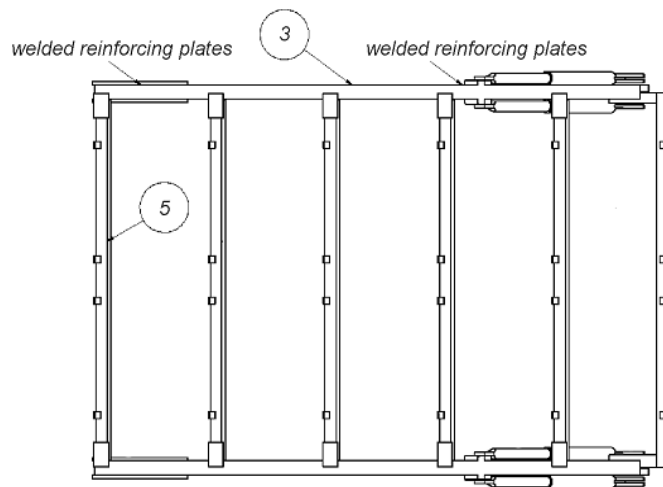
Top-view of PV support structure. Callout balloons 3 and 5 identify the main beams (S8-18.4 I-beams with weldments) and the spanning beams (L3.5x3.5x3/8 with weldments), respectively.
